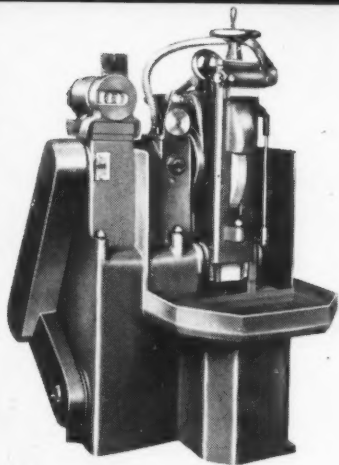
(Left) Oliver 20-inch Tool-bit Grinder with Separate Templet Grinding Wheel
